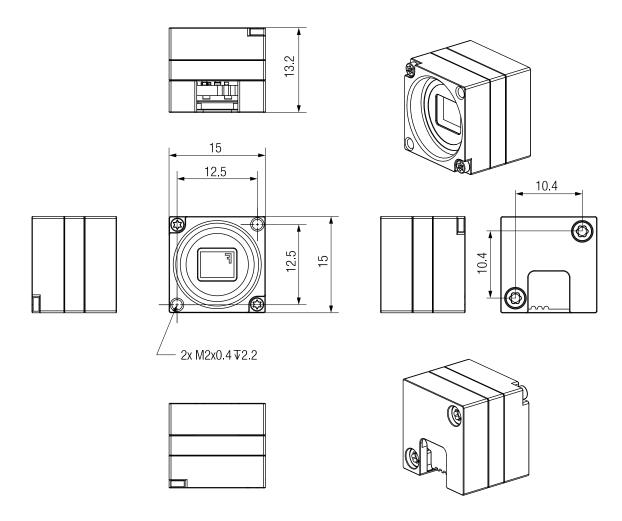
Dimensional drawing of MU050xR-SY with ADPT-MU-CX3-UC adapter
